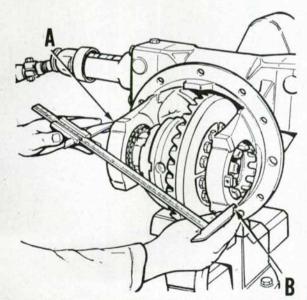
When setting differential carrier bearing preload, measure distance across two diagonally opposite machined lugs (A and B) on differential carrier. Refer to text.
